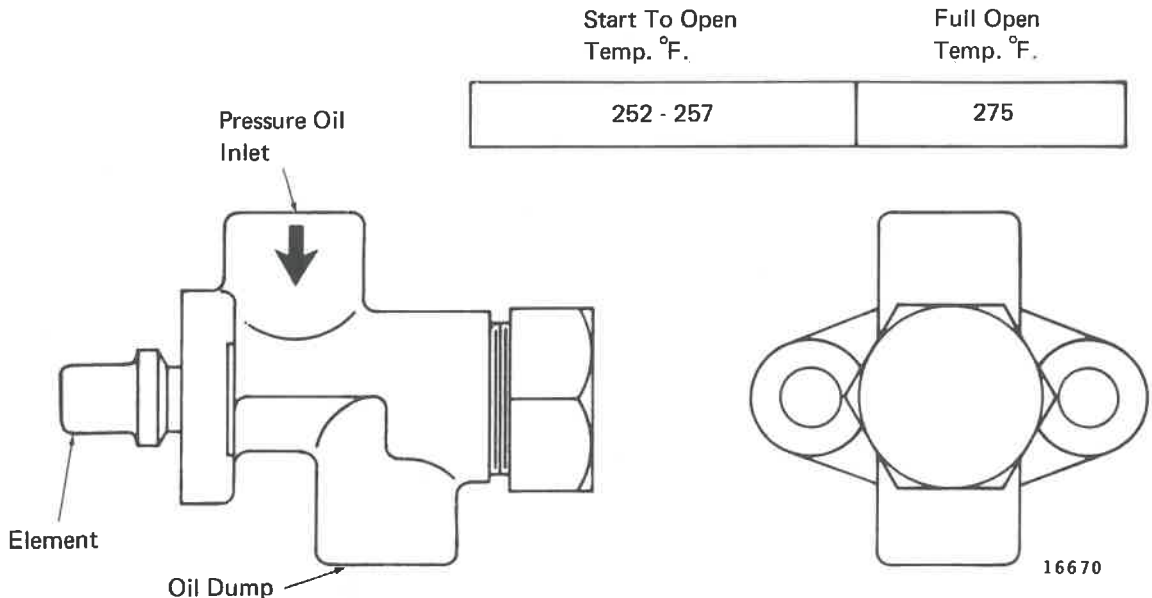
Hot Oil Detector Thermostatic Valve
